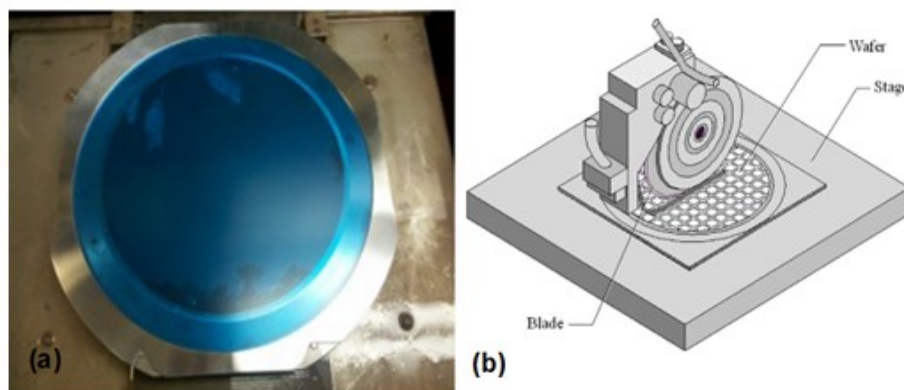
(a) A wafer mounted to dicing tape, ready for blade dicing (b) Wafer saw and sliced wafer
